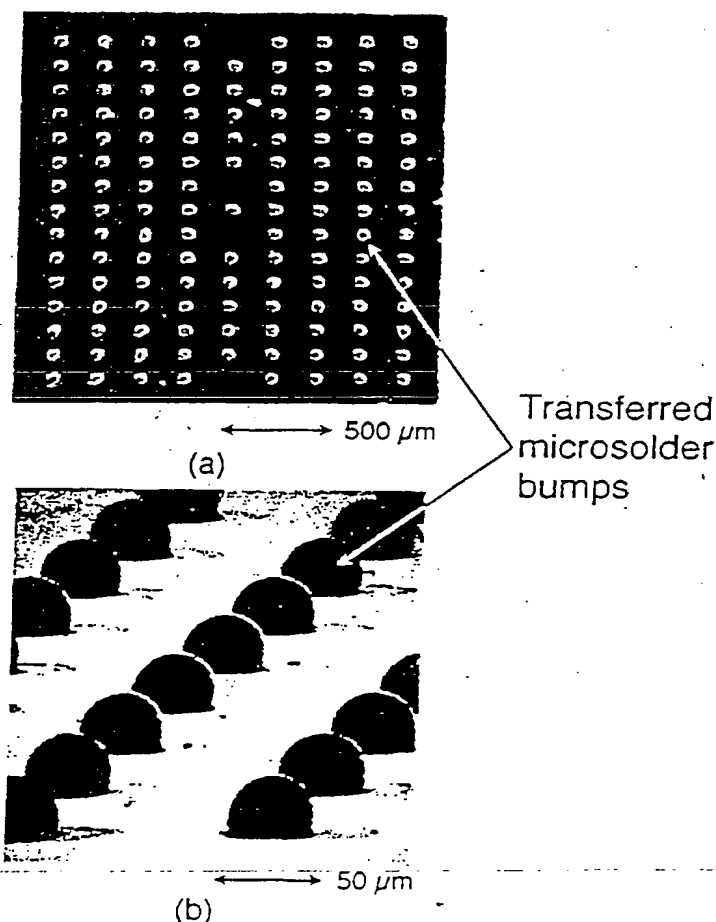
Transferred microsolder bumps of Au-Sn solder: (a) after transfer; (b) after reflow forming.
